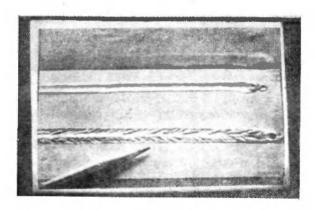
Appearence of bead of welds on aluminium without and with an external magnetic field.
